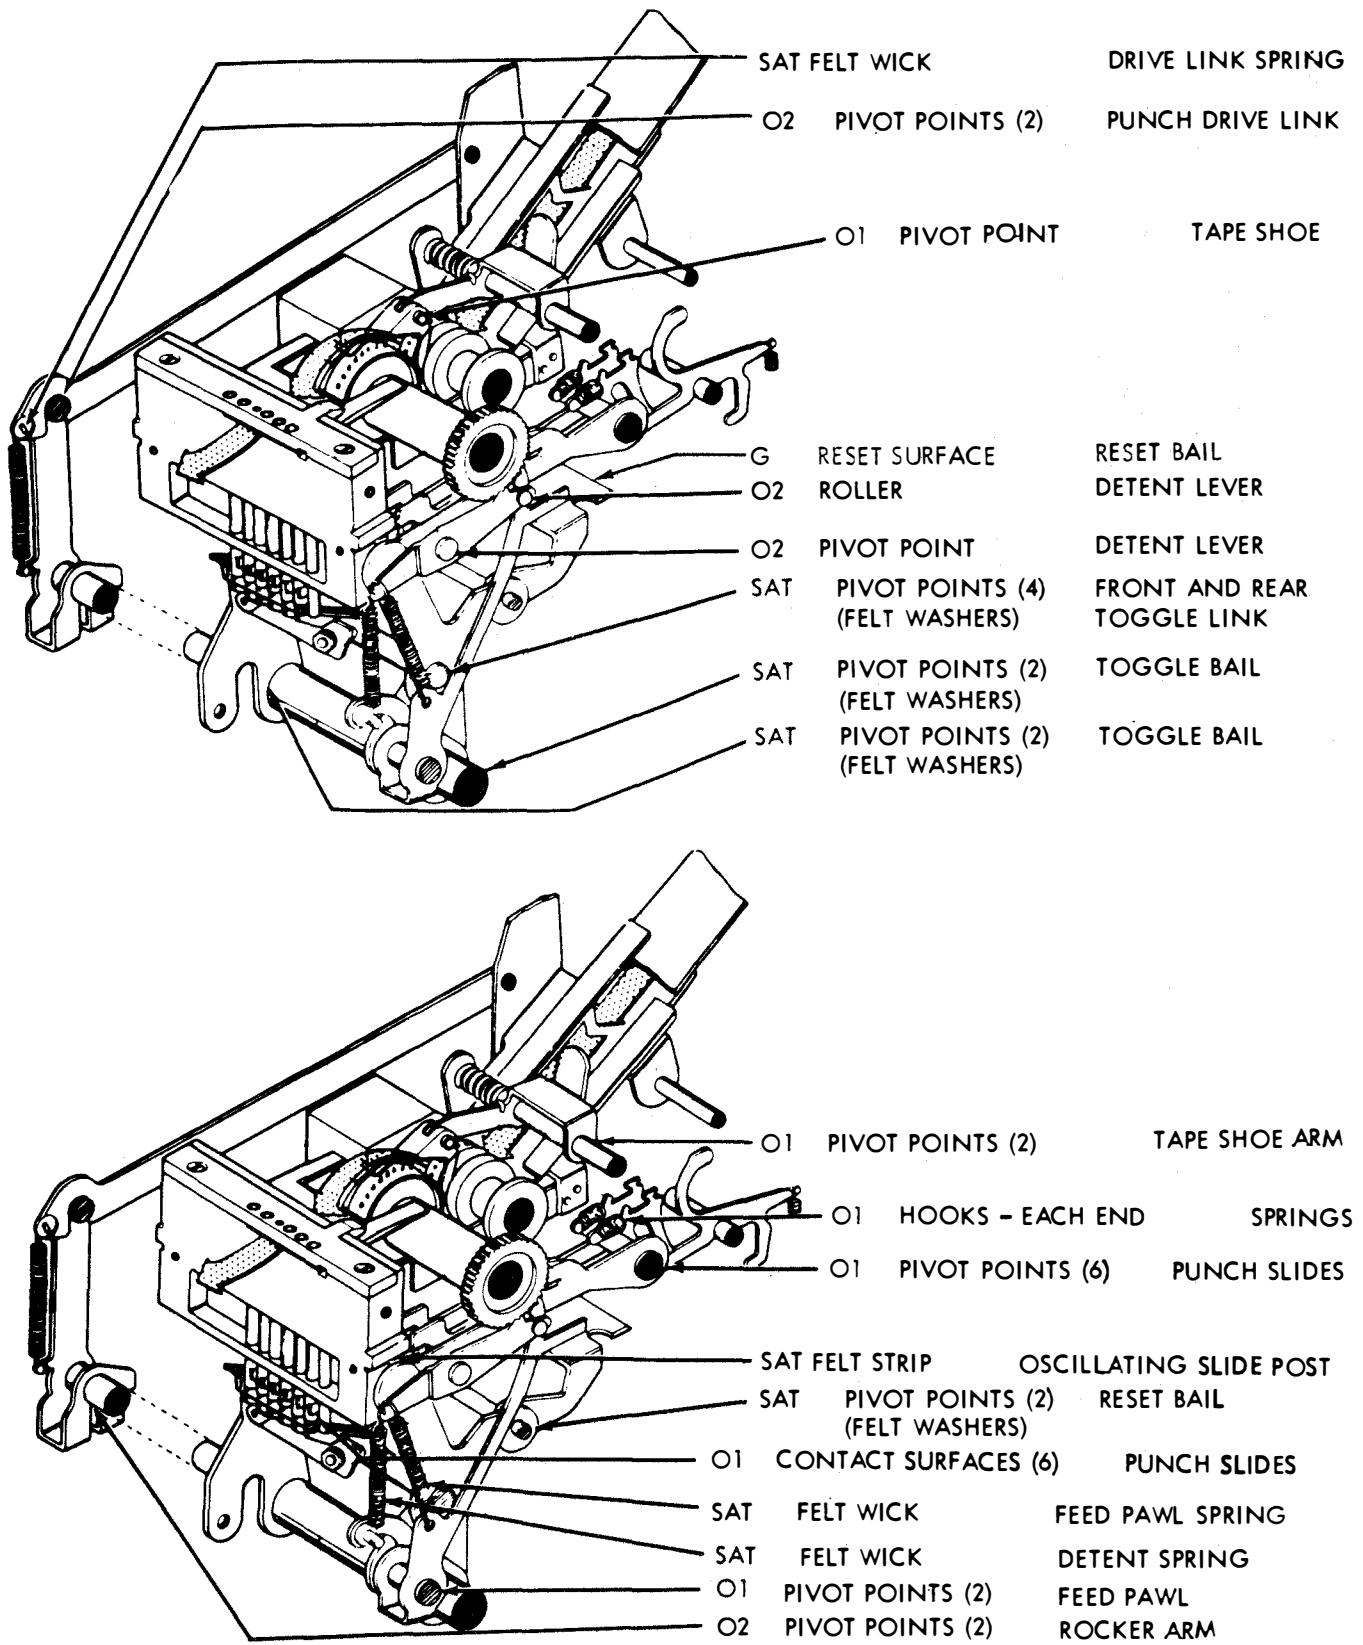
Punch Mechanism for Fully-Perforated Tape (Sheet 1 of 2)
